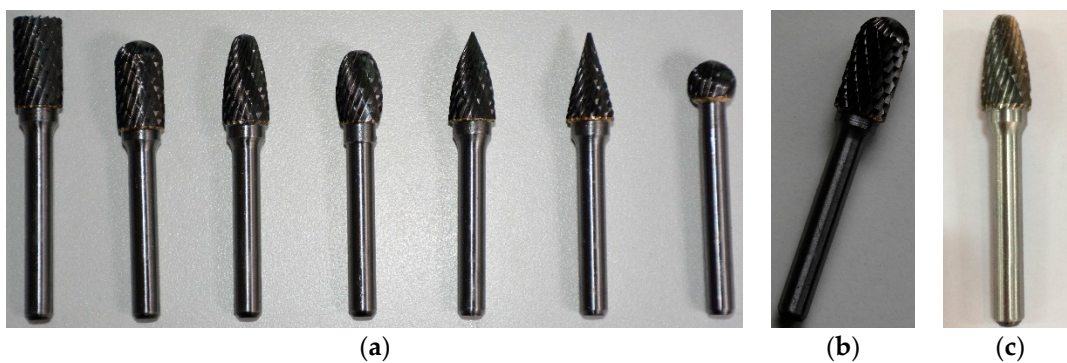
Carbide rotary tools: (a) series of tools; (b) cylindrical ball nose tool; (c) arch ball nose tool.
